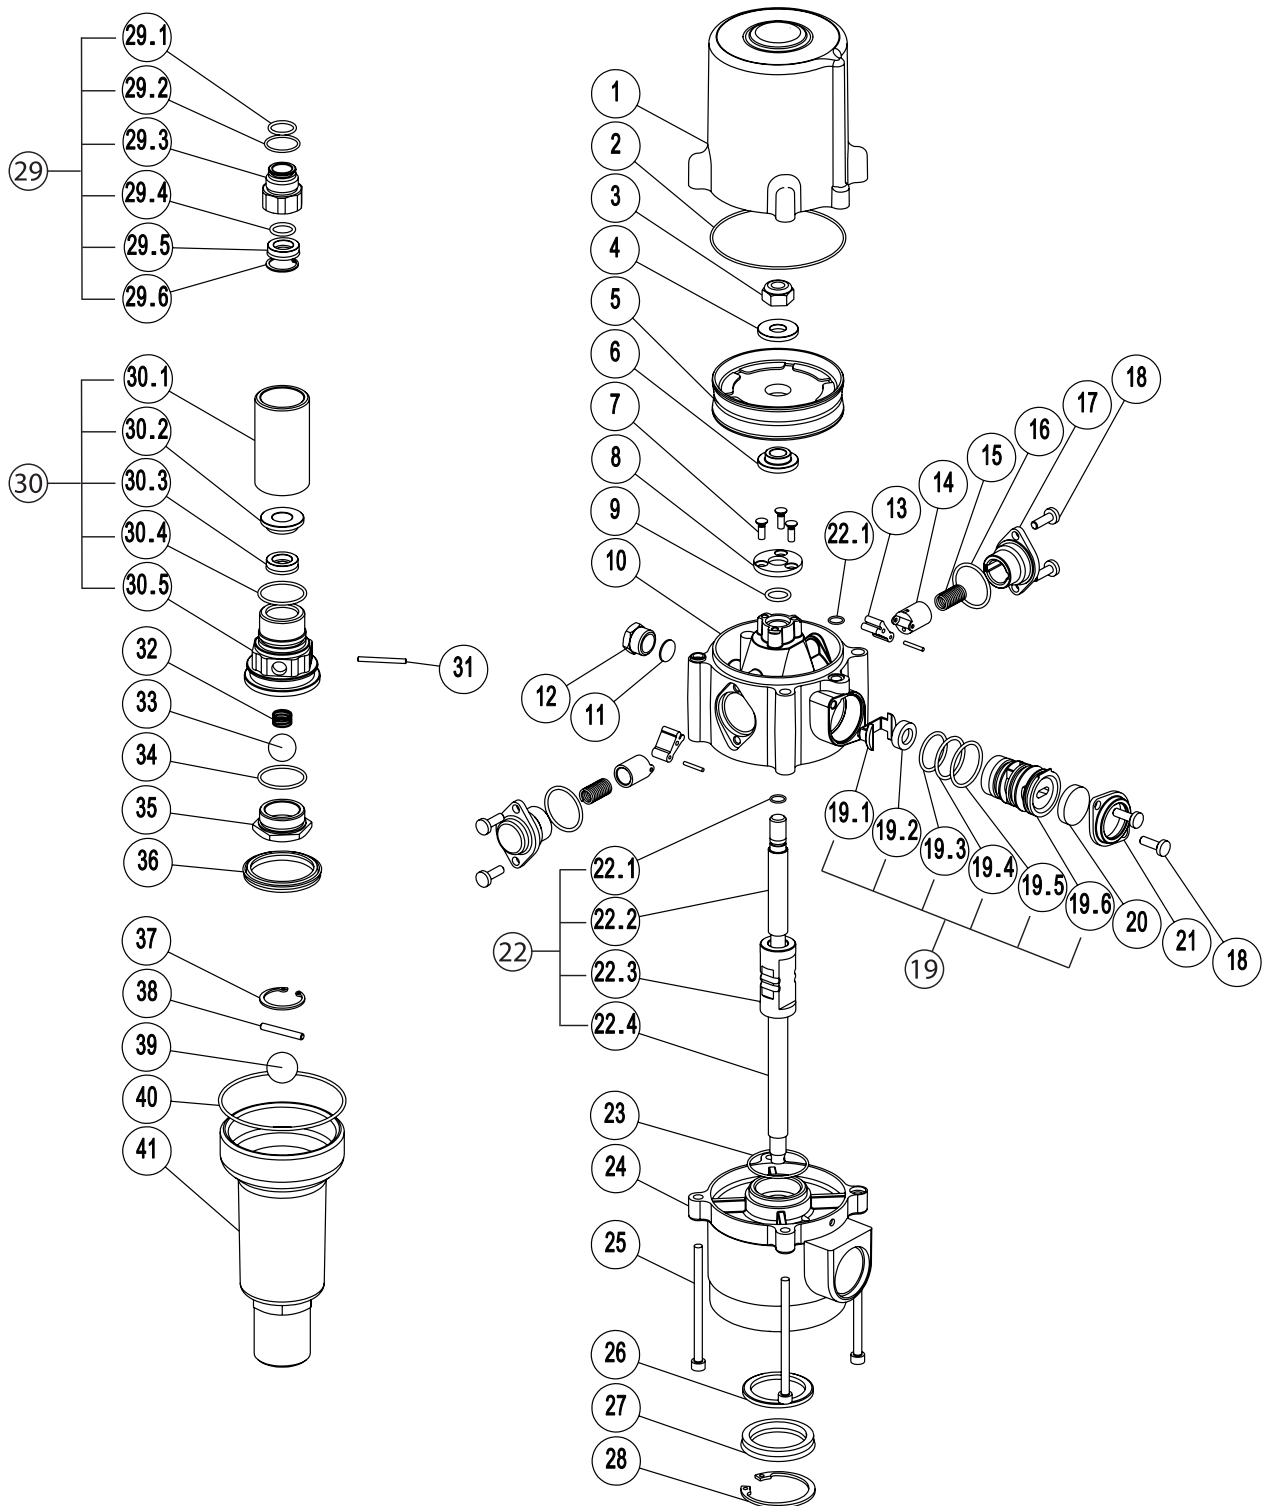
Exploded View of the Pneumatic Oil Pump
